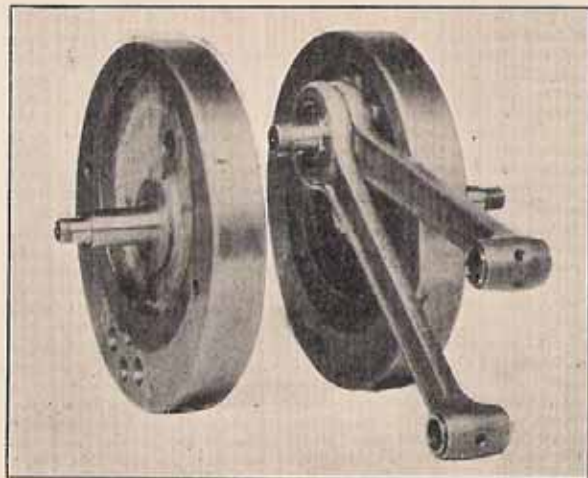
CONNECTING-ROD MOUNTING OF TWIN CYLINDER
